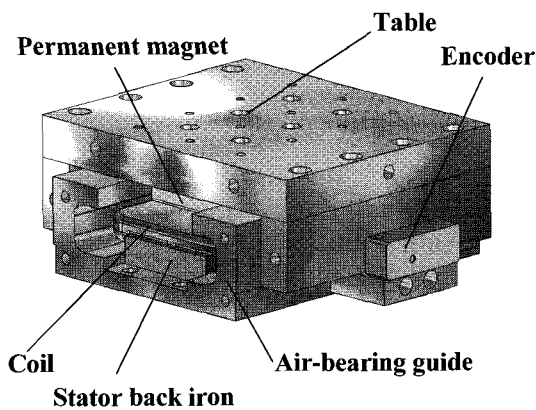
Single-axis miniature air-bearing stage with a linear motor
